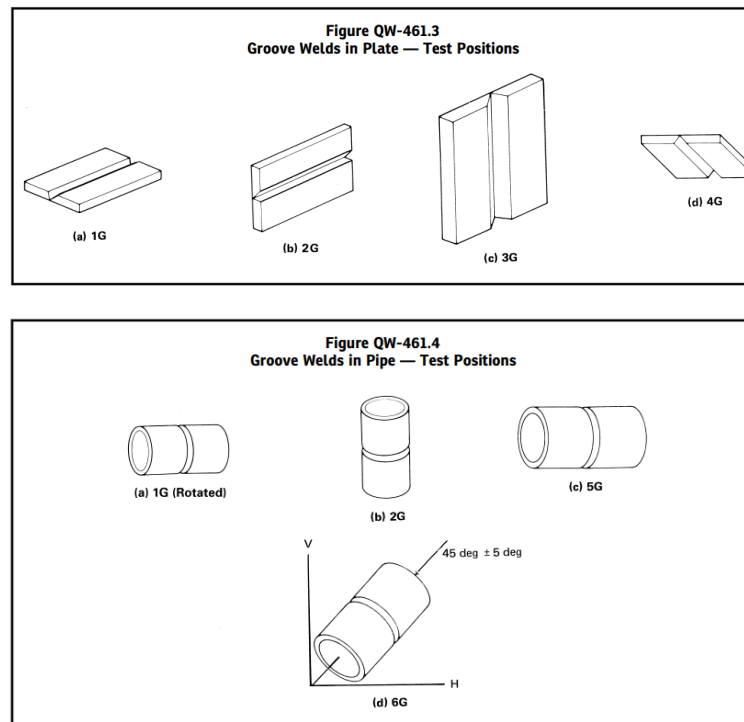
Welding Position According to ASME Section IX [6]
